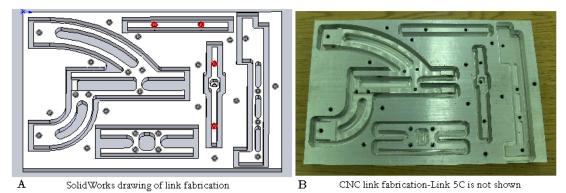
Showing arrangement of links for fabrication. Image B shows the aluminum fixture plate located below the fabrication plate. Link 5C is not shown in image B.
